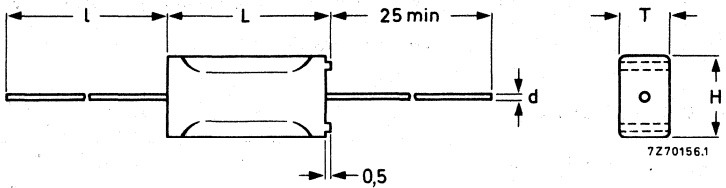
For dimensions T, L, H, d and l, see tables below.
